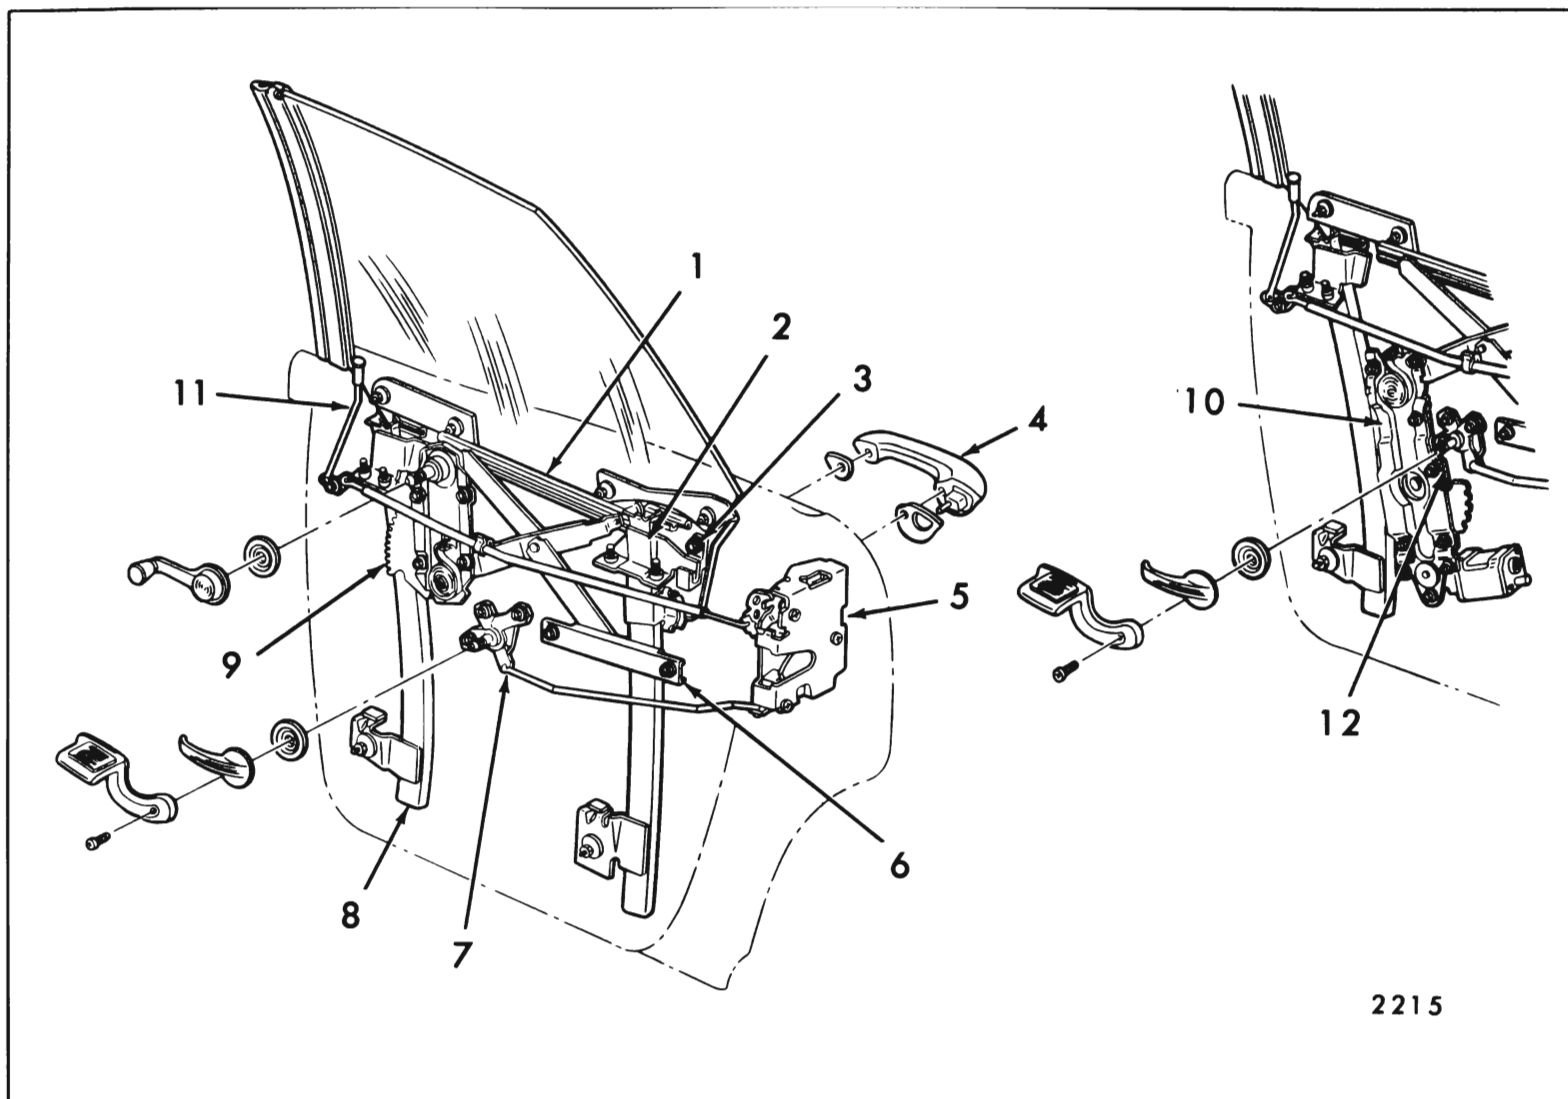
Rear Door Hardware - "A-39" Styles
